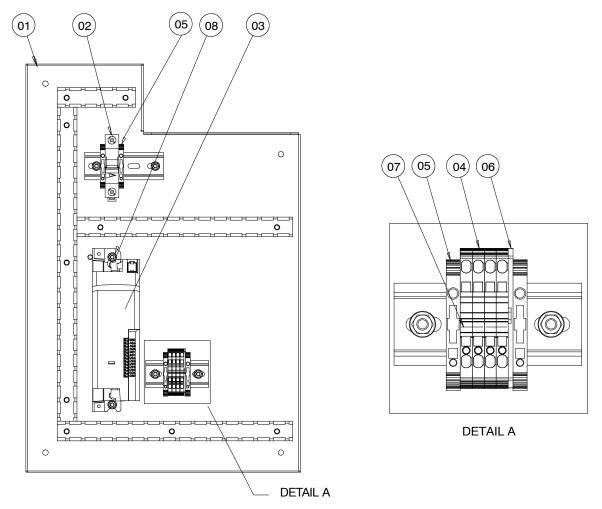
Melter back panel assembly parts (400V melter shown)
